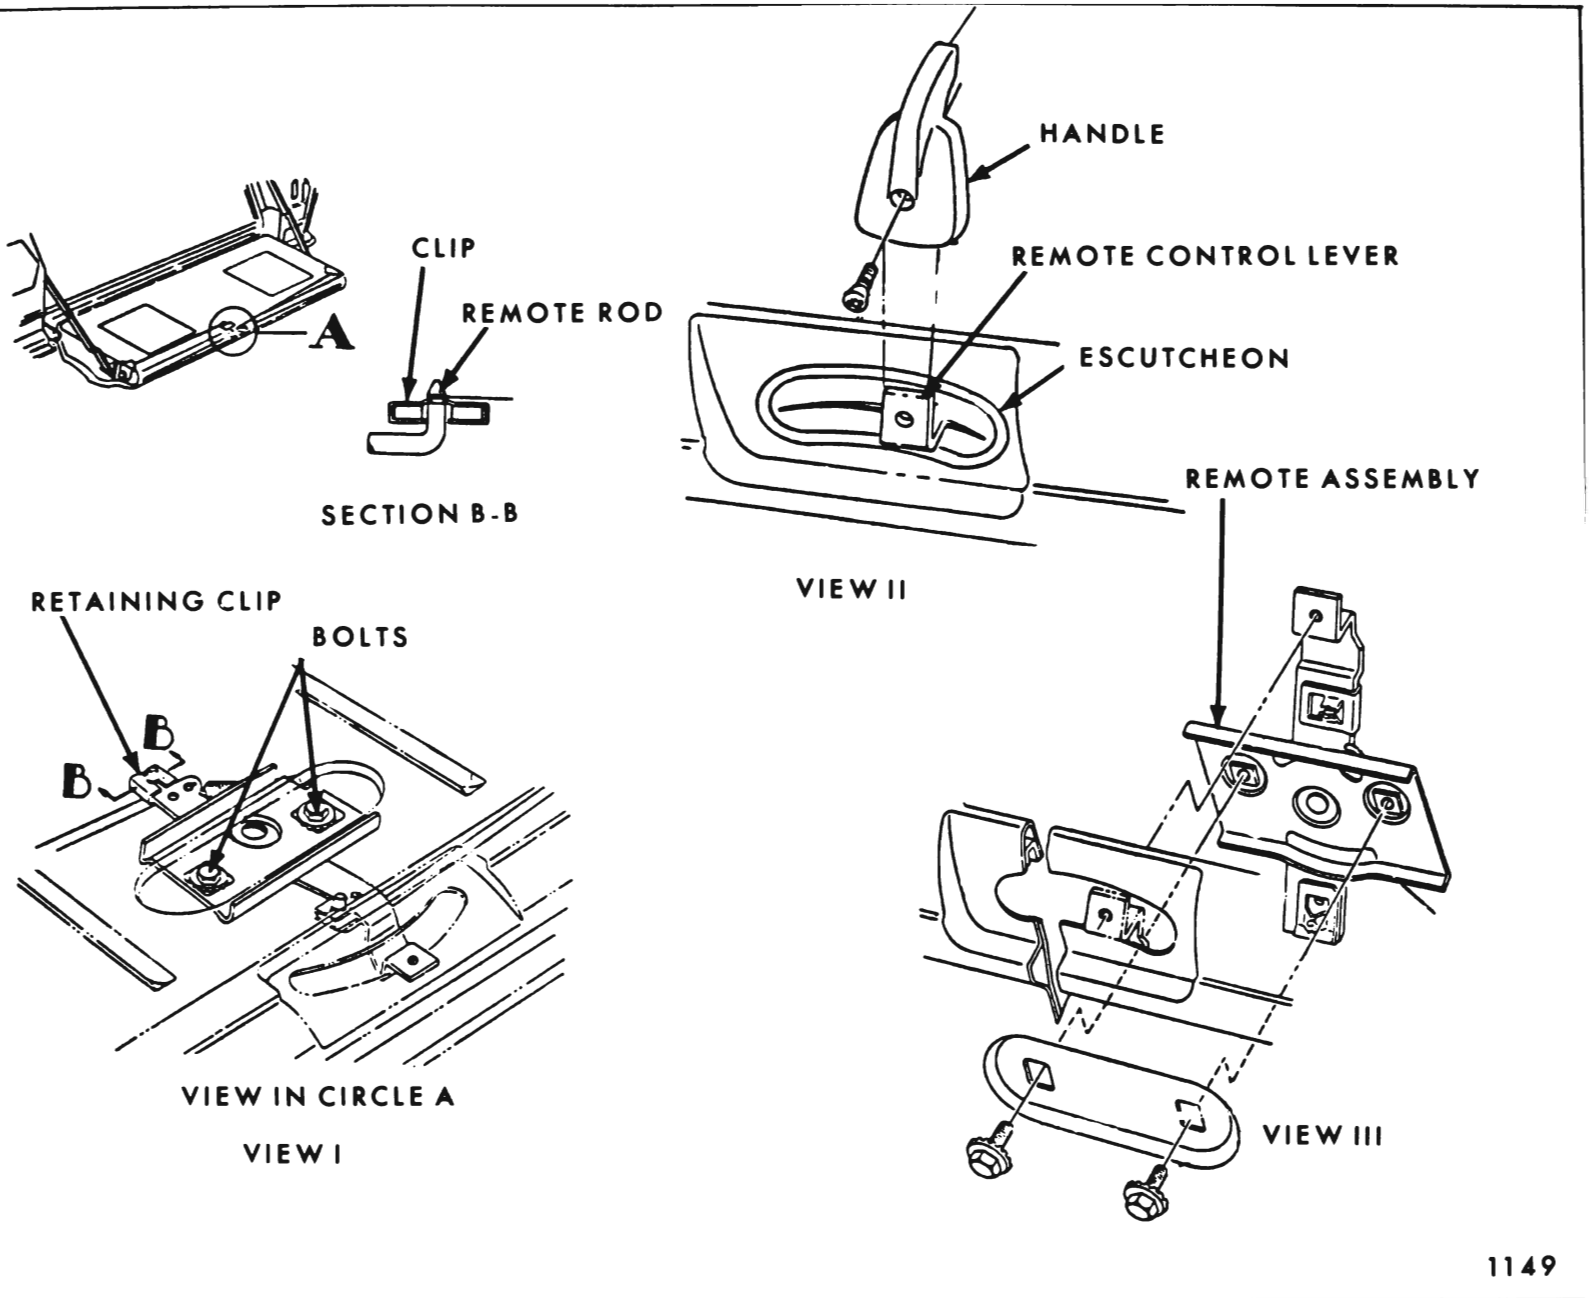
Tail Gate Lock Remote Control Assembly - "X" Body Styles
